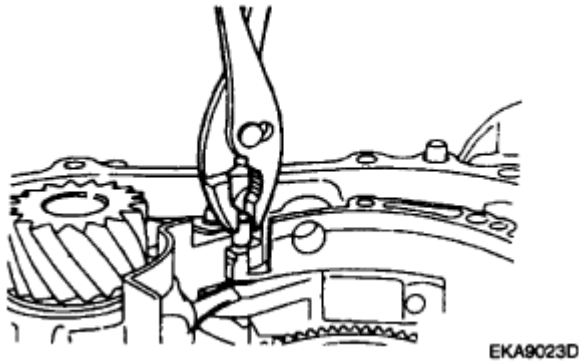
Identifying Stopper Pin, Stopper Plug, Control Valve, And Coil Spring
